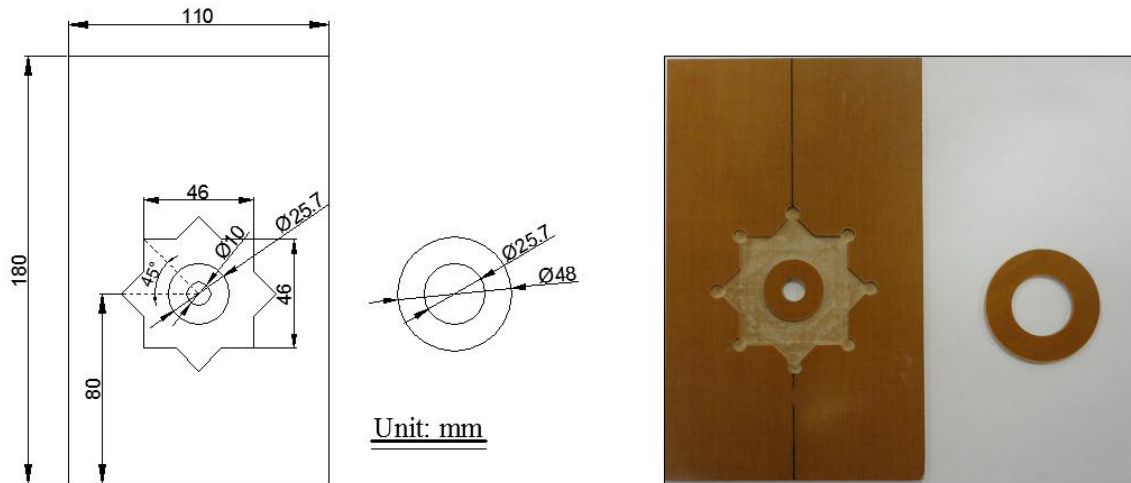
(a) The geometric design of the sample holder for square shape YBCO samples; (b) the machined TUFNOL holder of 3 mm thick for the square shape YBCO samples.
